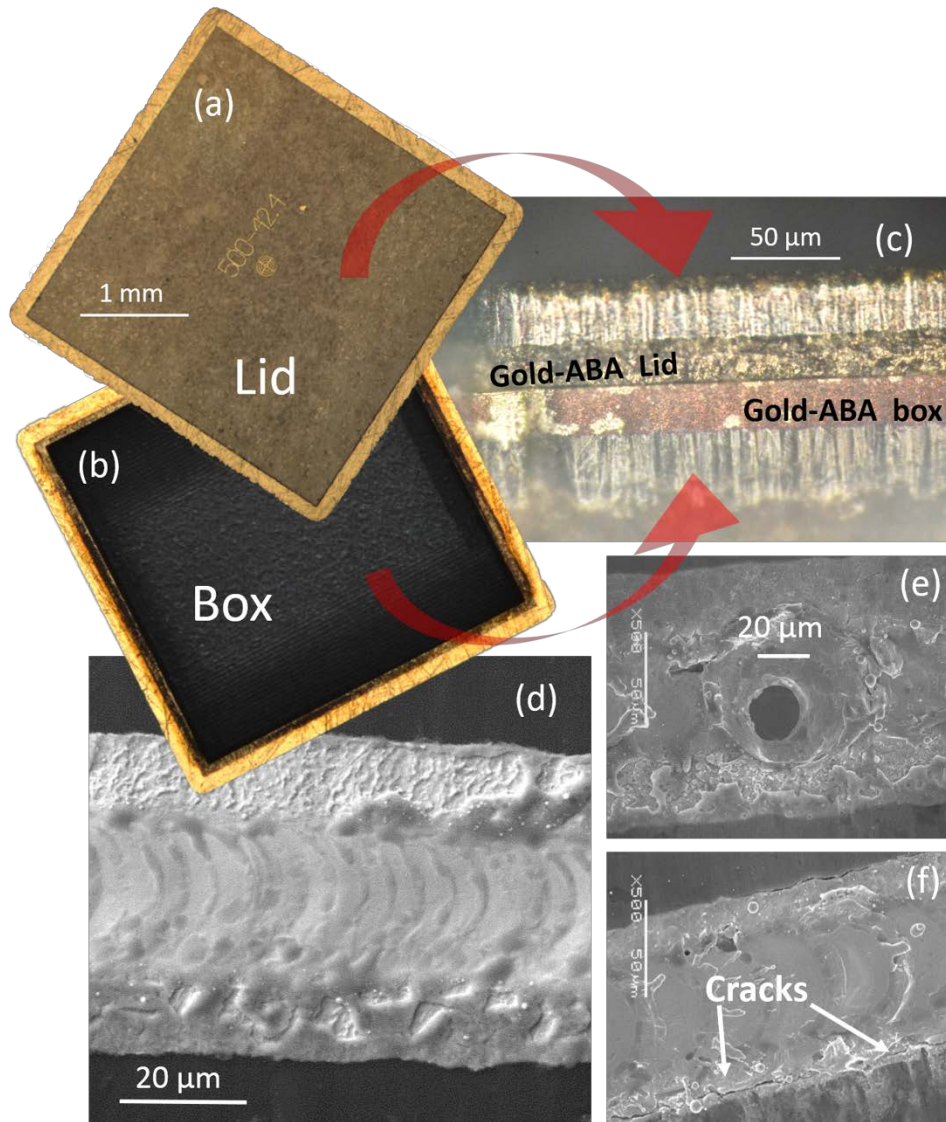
Photograph of a box (b) and box lid (a) showing the inlaid braze weld line and (c) the two box parts aligned and held together, before welding. A SEM image of a successful weld seam is shown in (d) and the two most common defects, holes and cracks are shown in (e) and (f) respectively.
